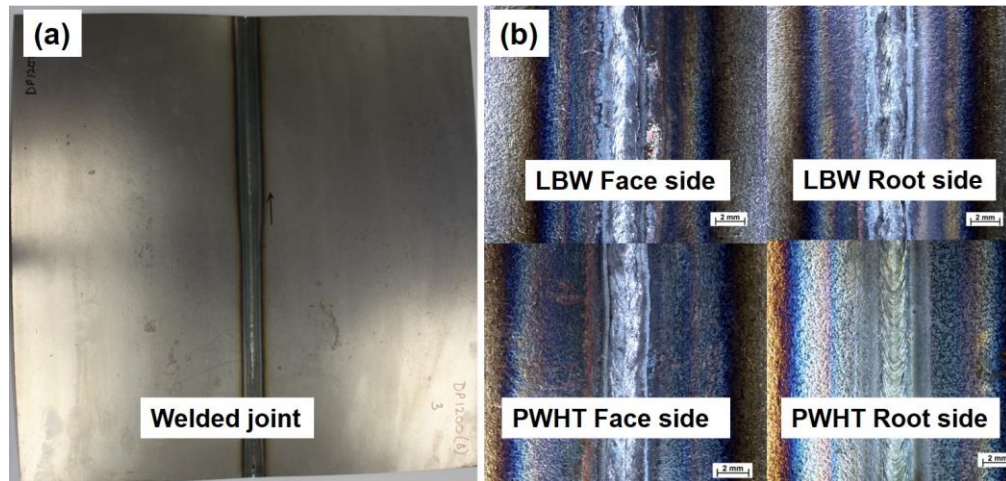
DP1200 (a) Butt welded joint (b) LBW & PWHT joints
